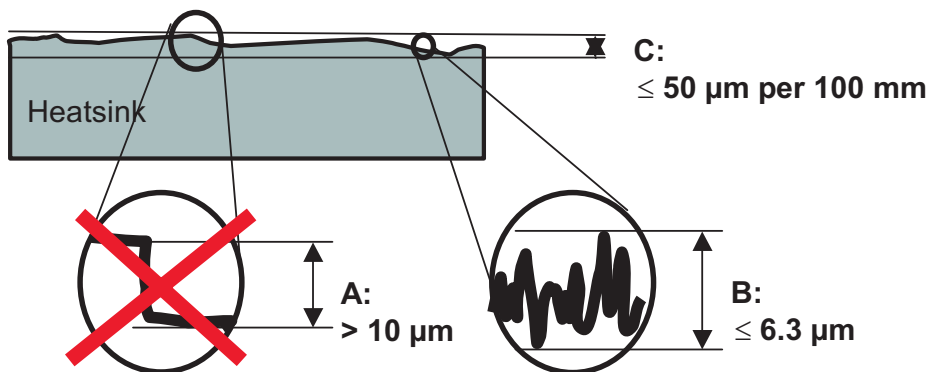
Mechanical specifications for power module mounting surface (example)
